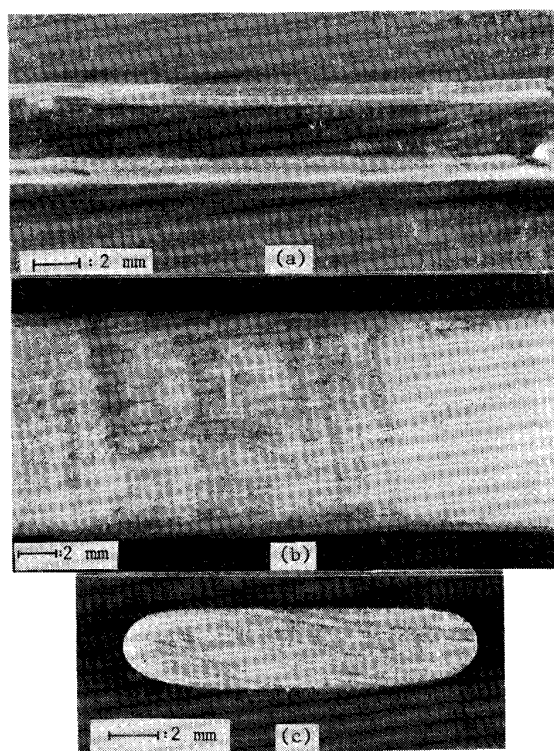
Magnified view of (a) rod, (b) thin plate and (c) cross-section of the thin plate cast by the horizontal electromagnetic casting process given in Fig. 7.
